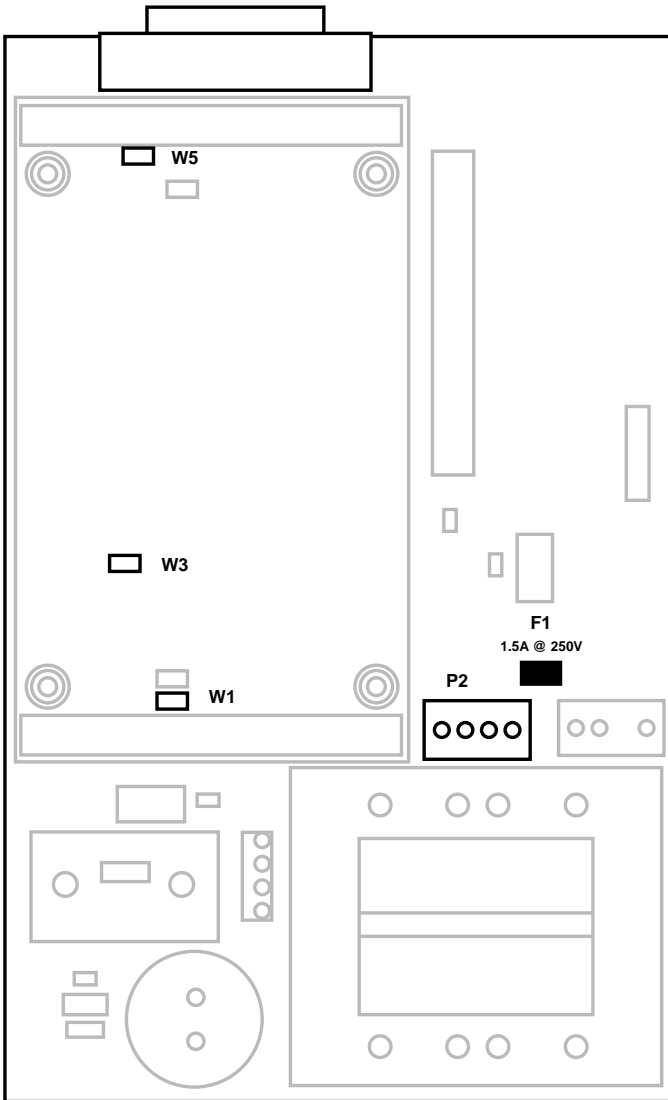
The circuit board of a “narrow” Converter (IC124A).
